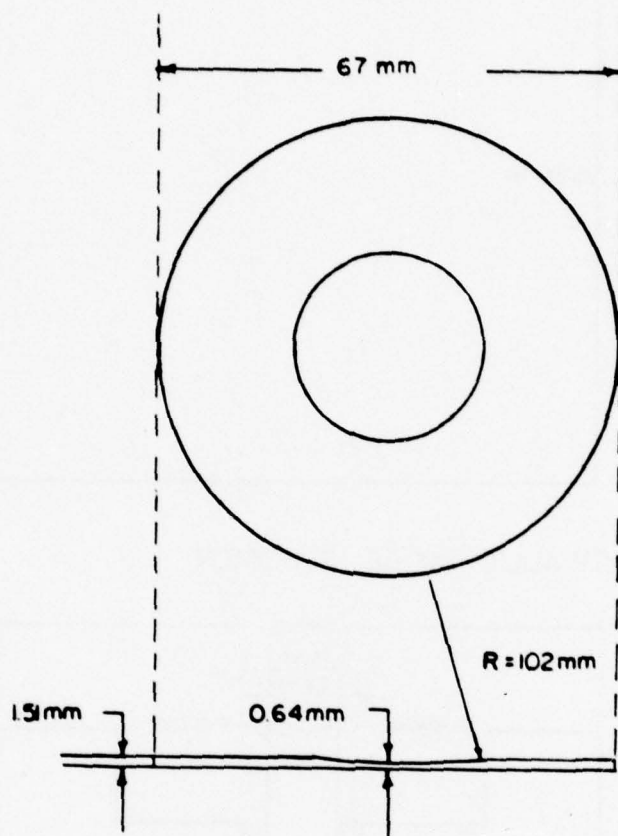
HYDRAULIC BULGE TEST SPECIMEN
